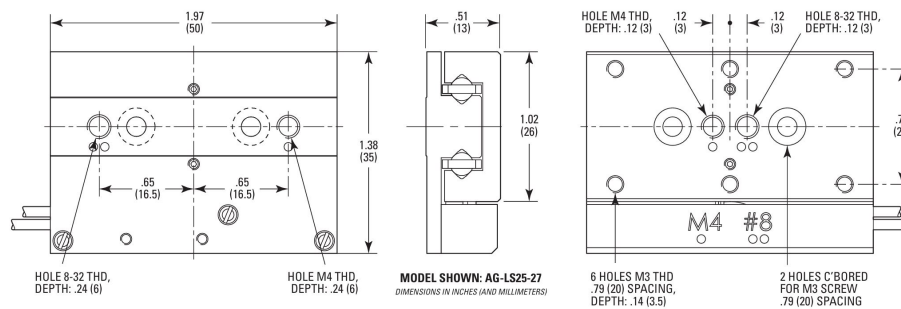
Technical drawing of the Newport Agilis AG-LS25-27 showing the mounting hole pattern and overall dimensions [78].
